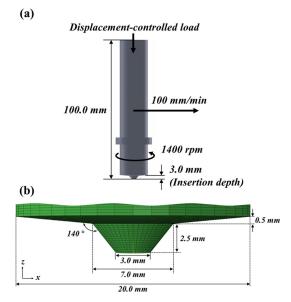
Conventional frictional stir welding tool behavior (a) and conventional fictional stir welding tool dimension including the finite element(b).
